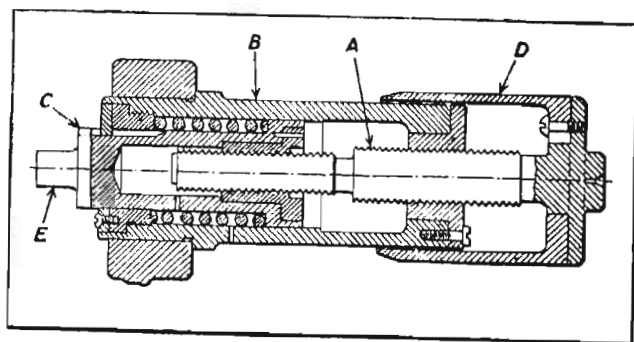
Cross-sectional View of Differential Screw Mechanism of Micrometer.
